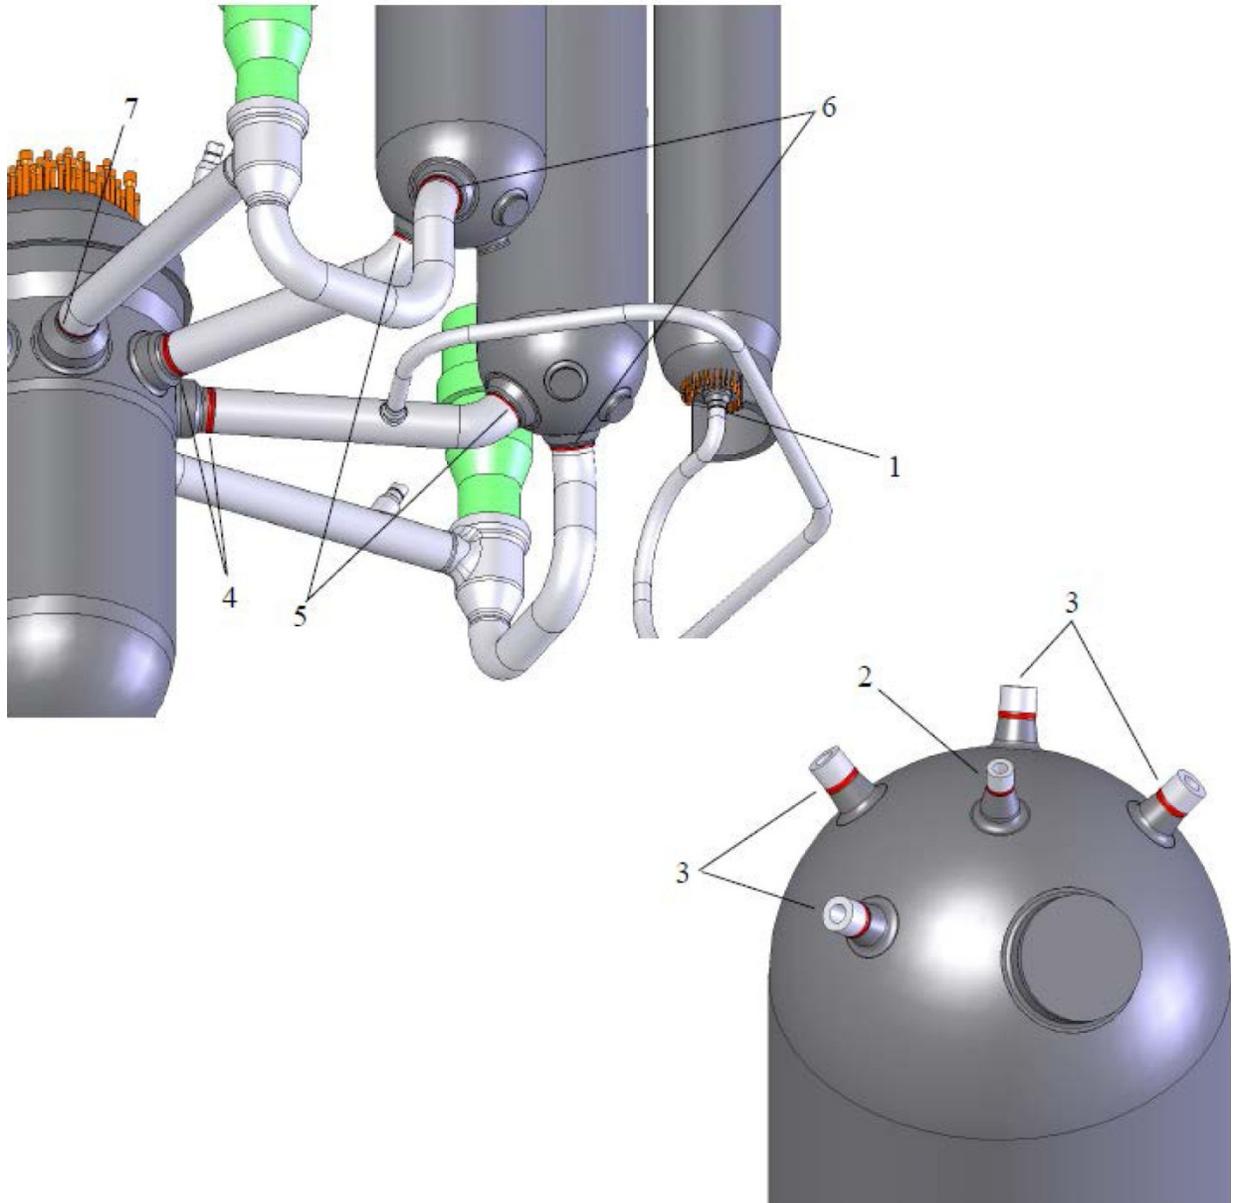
Typical Locations of Alloy 82/182 Butt Welds in Westinghouse Design Plants
